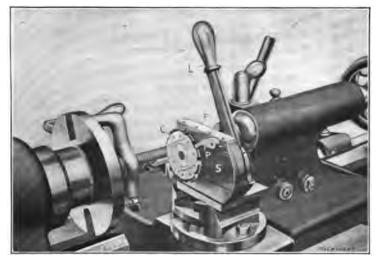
Rivett-Dock Circular Threading Tool in Working Position
